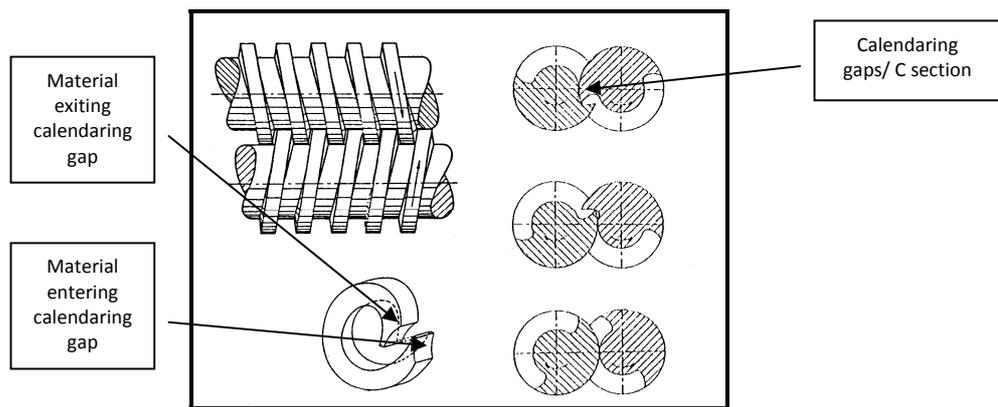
Intermeshing counter rotating twin crew extruder [6].
